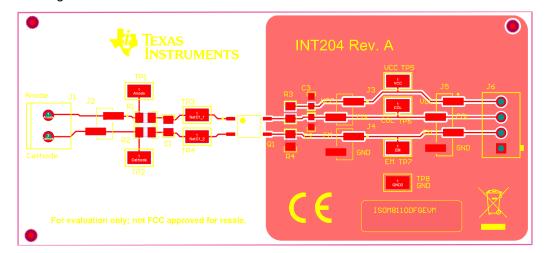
ISOM8110DFGEVM PCB Layout - Top
